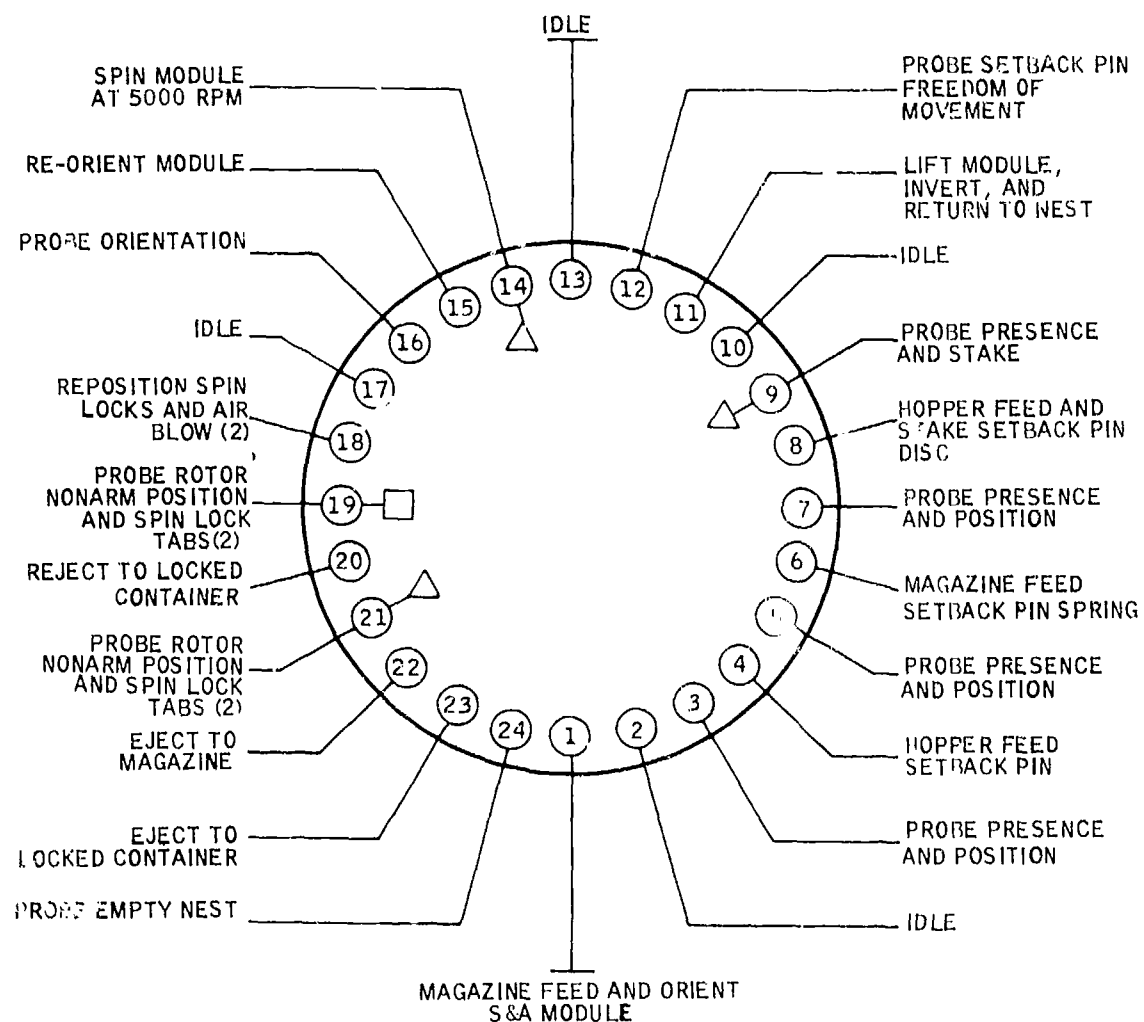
Dial schematic, machine S10 - S&A module assembly operation 2 (setback pin)
